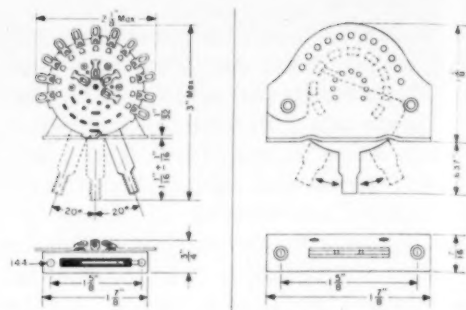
Rotary switches are small in size and offer quite versatile switching arrangement. Two typical switches are shown
